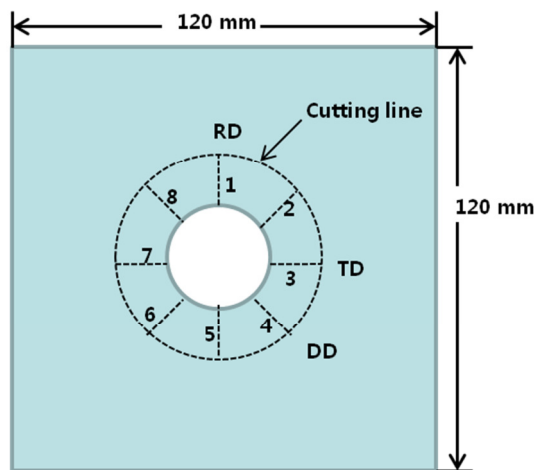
Specimen number of sheared edge for sheared angle punch .
